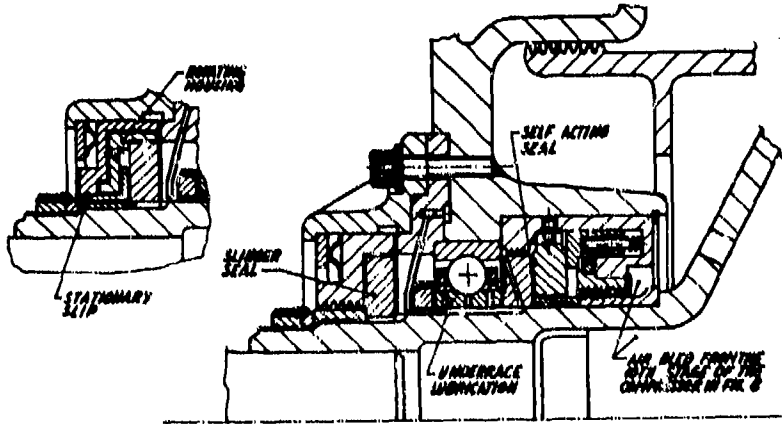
Possible oil seal pressurization with air of No. 1 bearing in figure 8.
